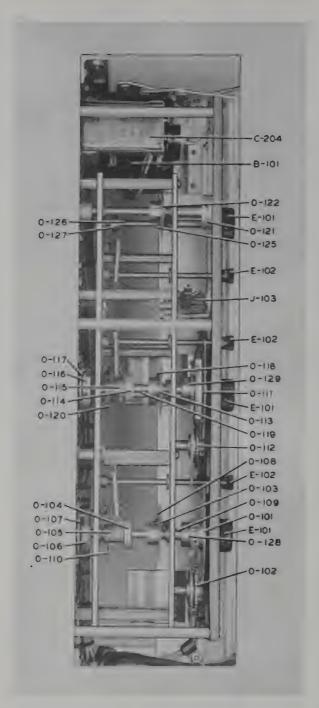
R-F Oscillator O-91/FRT-5, Dial Gears.
